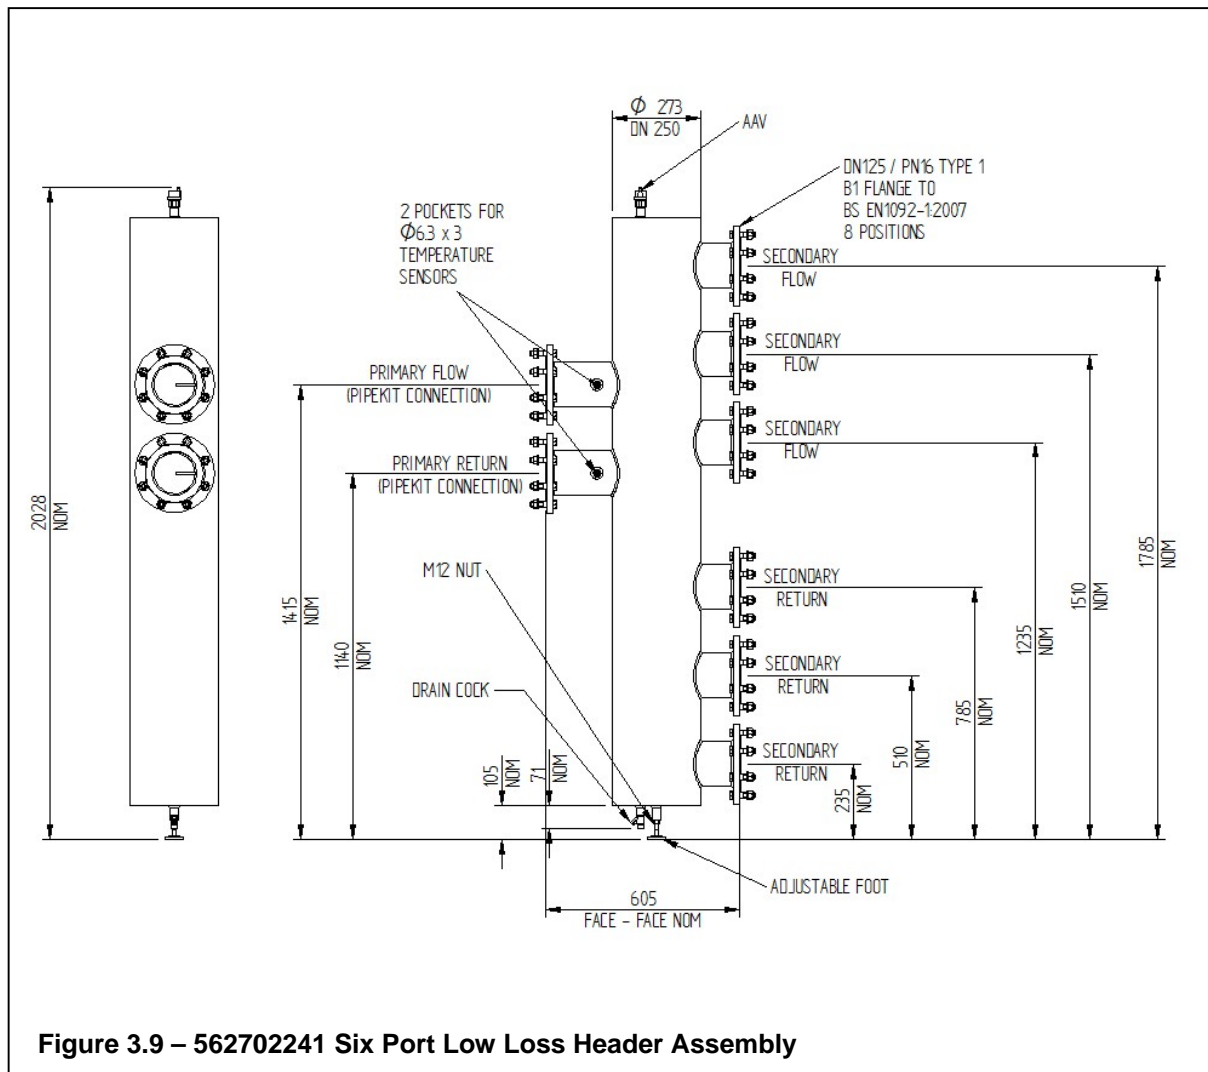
562702241 Six Port Low Loss Header Assembly
